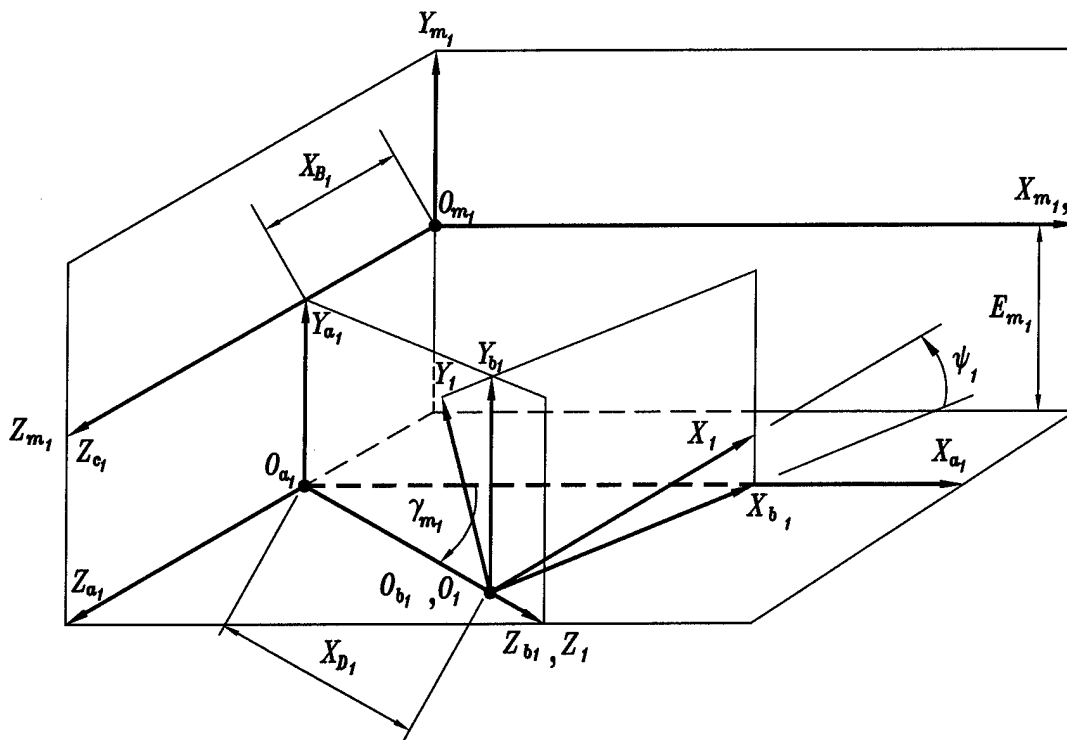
Machine tool settings for installment of the to-be-generated pinion.
